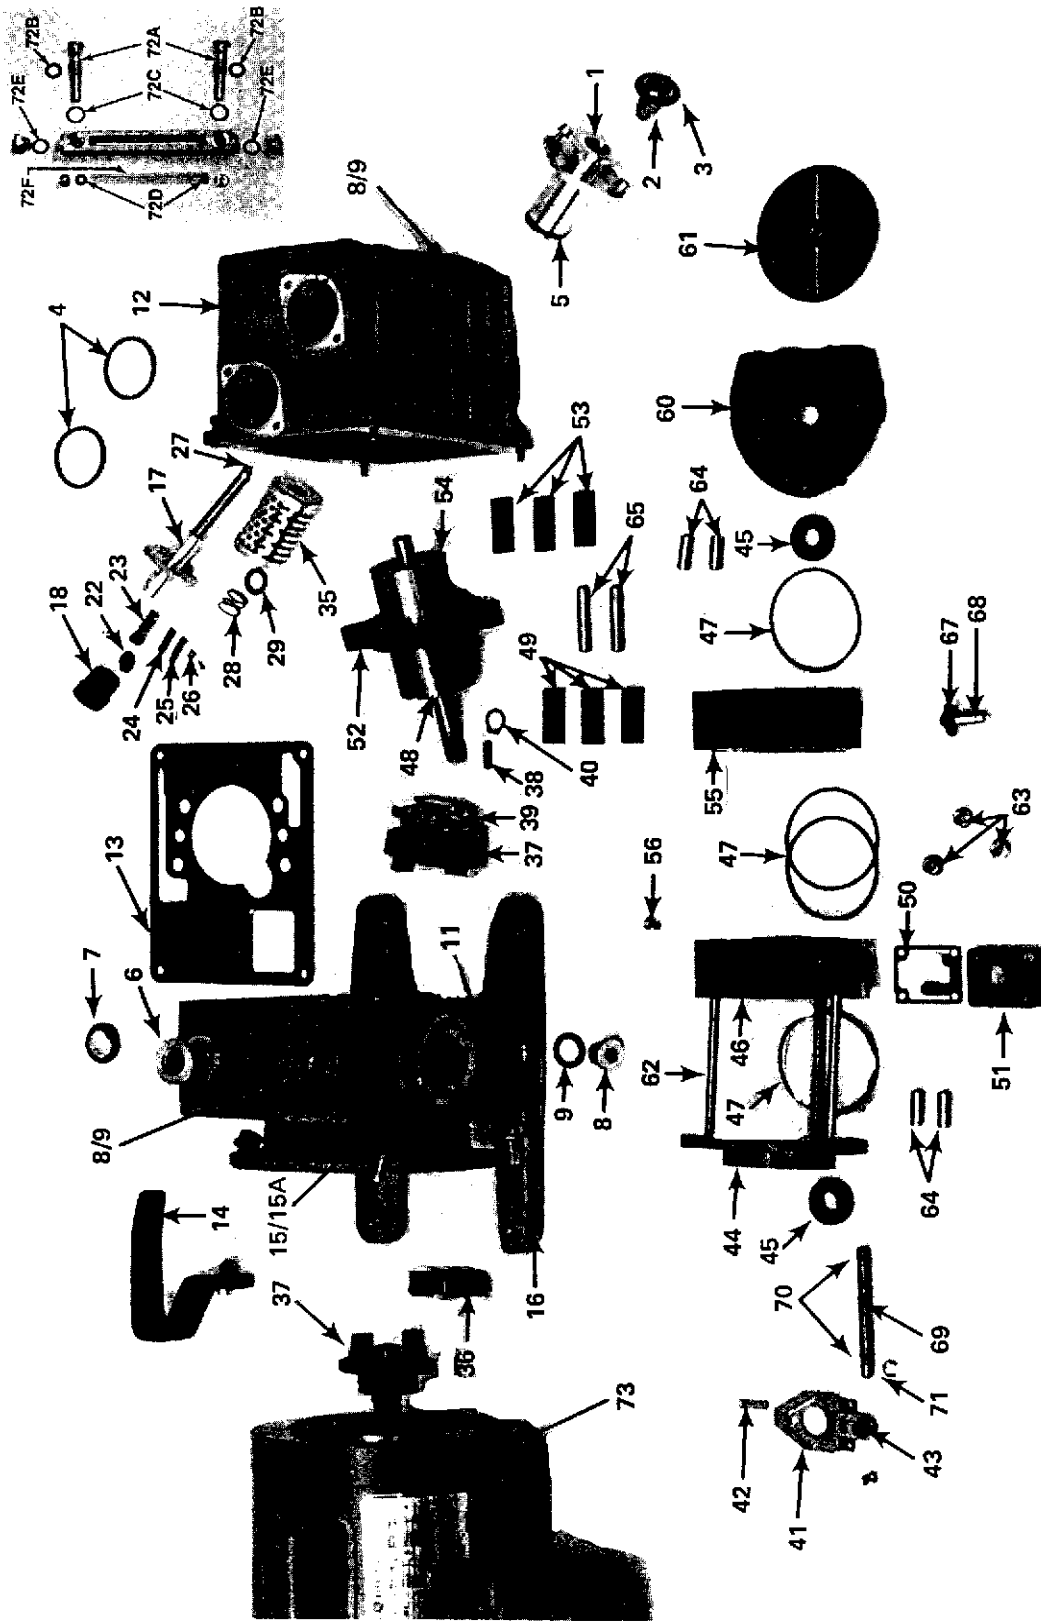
Disassembled Pump (D2A Pump Model Shown)
